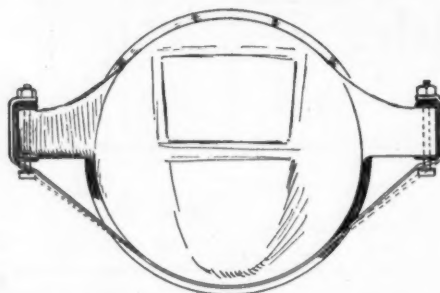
Suggestion for strengthening welded crankcase arm
